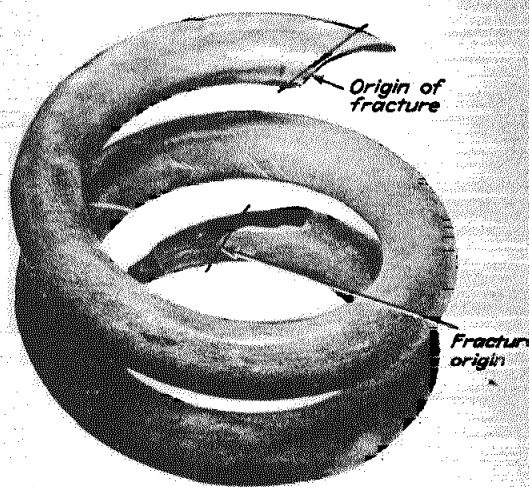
Experimental locomotive suspension spring shows two left hand helix fatigue fractures from service loads and several right hand helix fatigue cracks from residual tensile stress.
